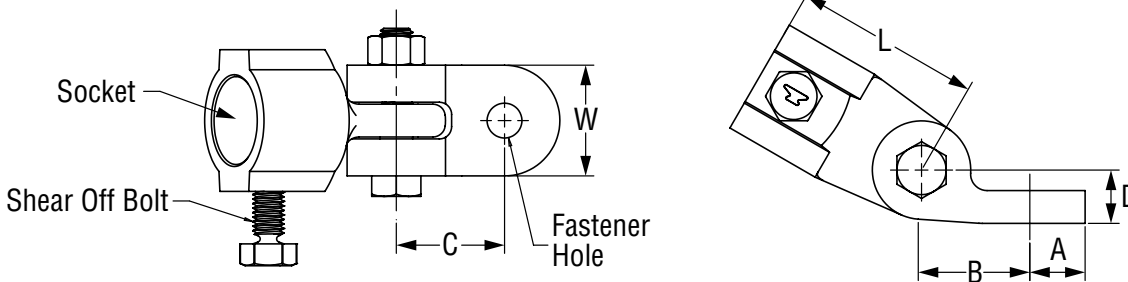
DIMENSIONS (IN) • WEIGHT (LBS)
